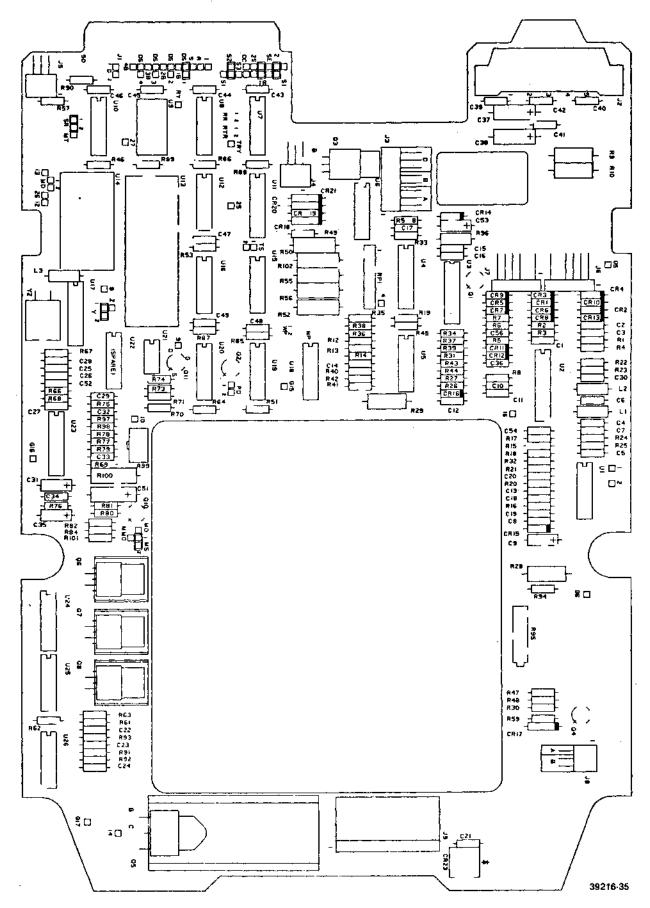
PCB COMPONENT LOCATIONS (P/N 25249)
